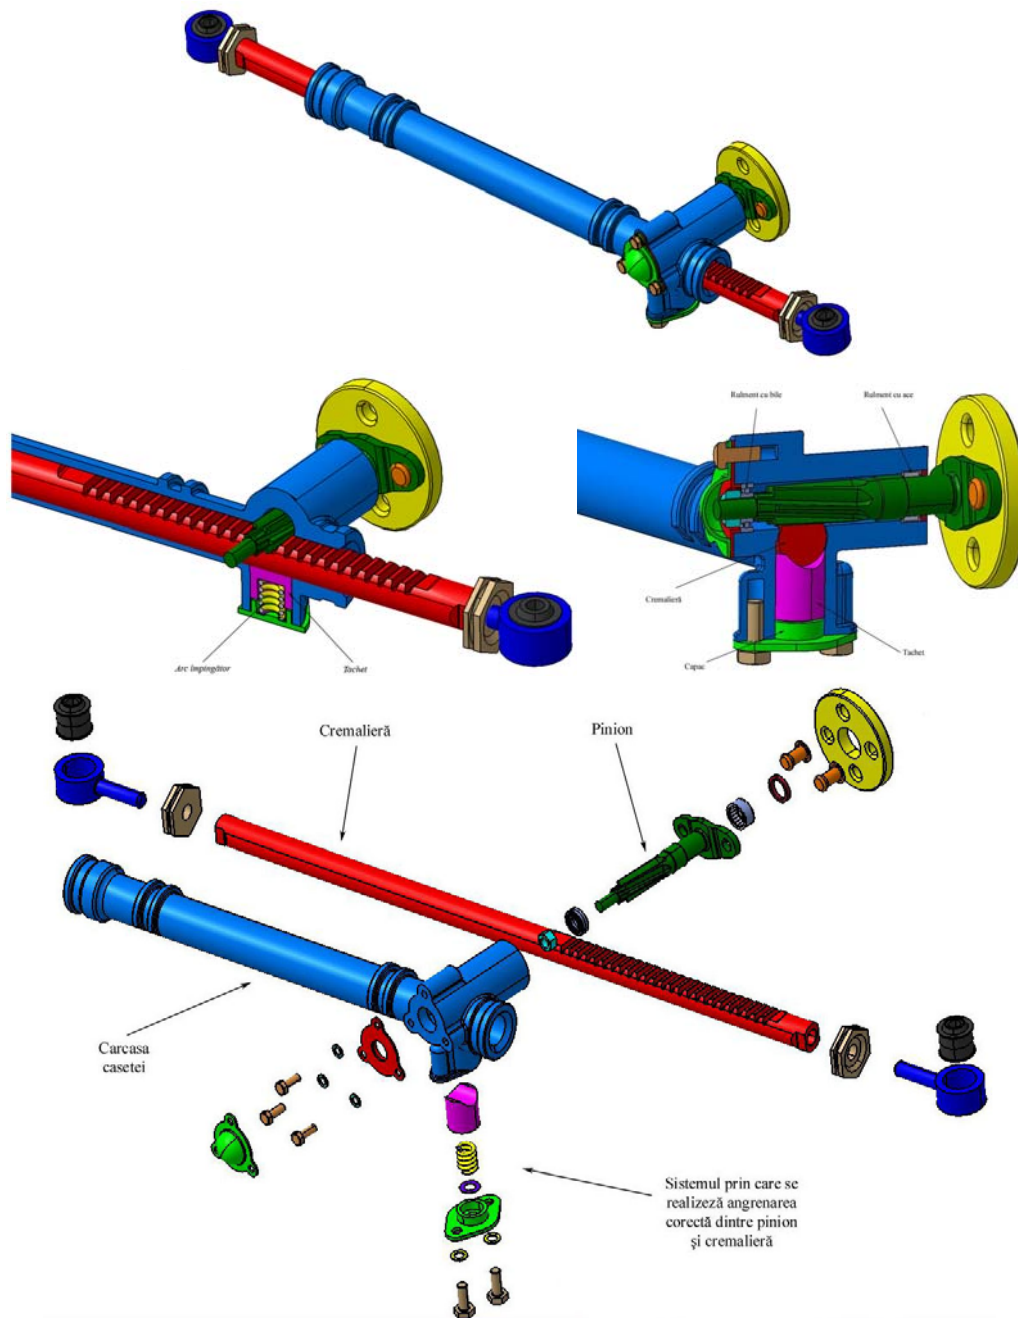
Subassembly CAD model included into the designed mechanism – rack and pinion steering box
